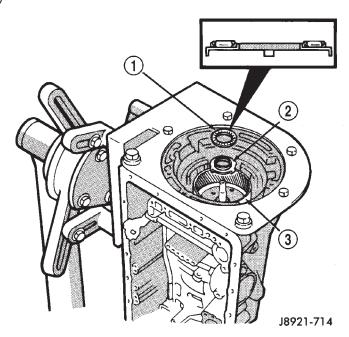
Installing Ring Gear Thrust Bearing And Race
